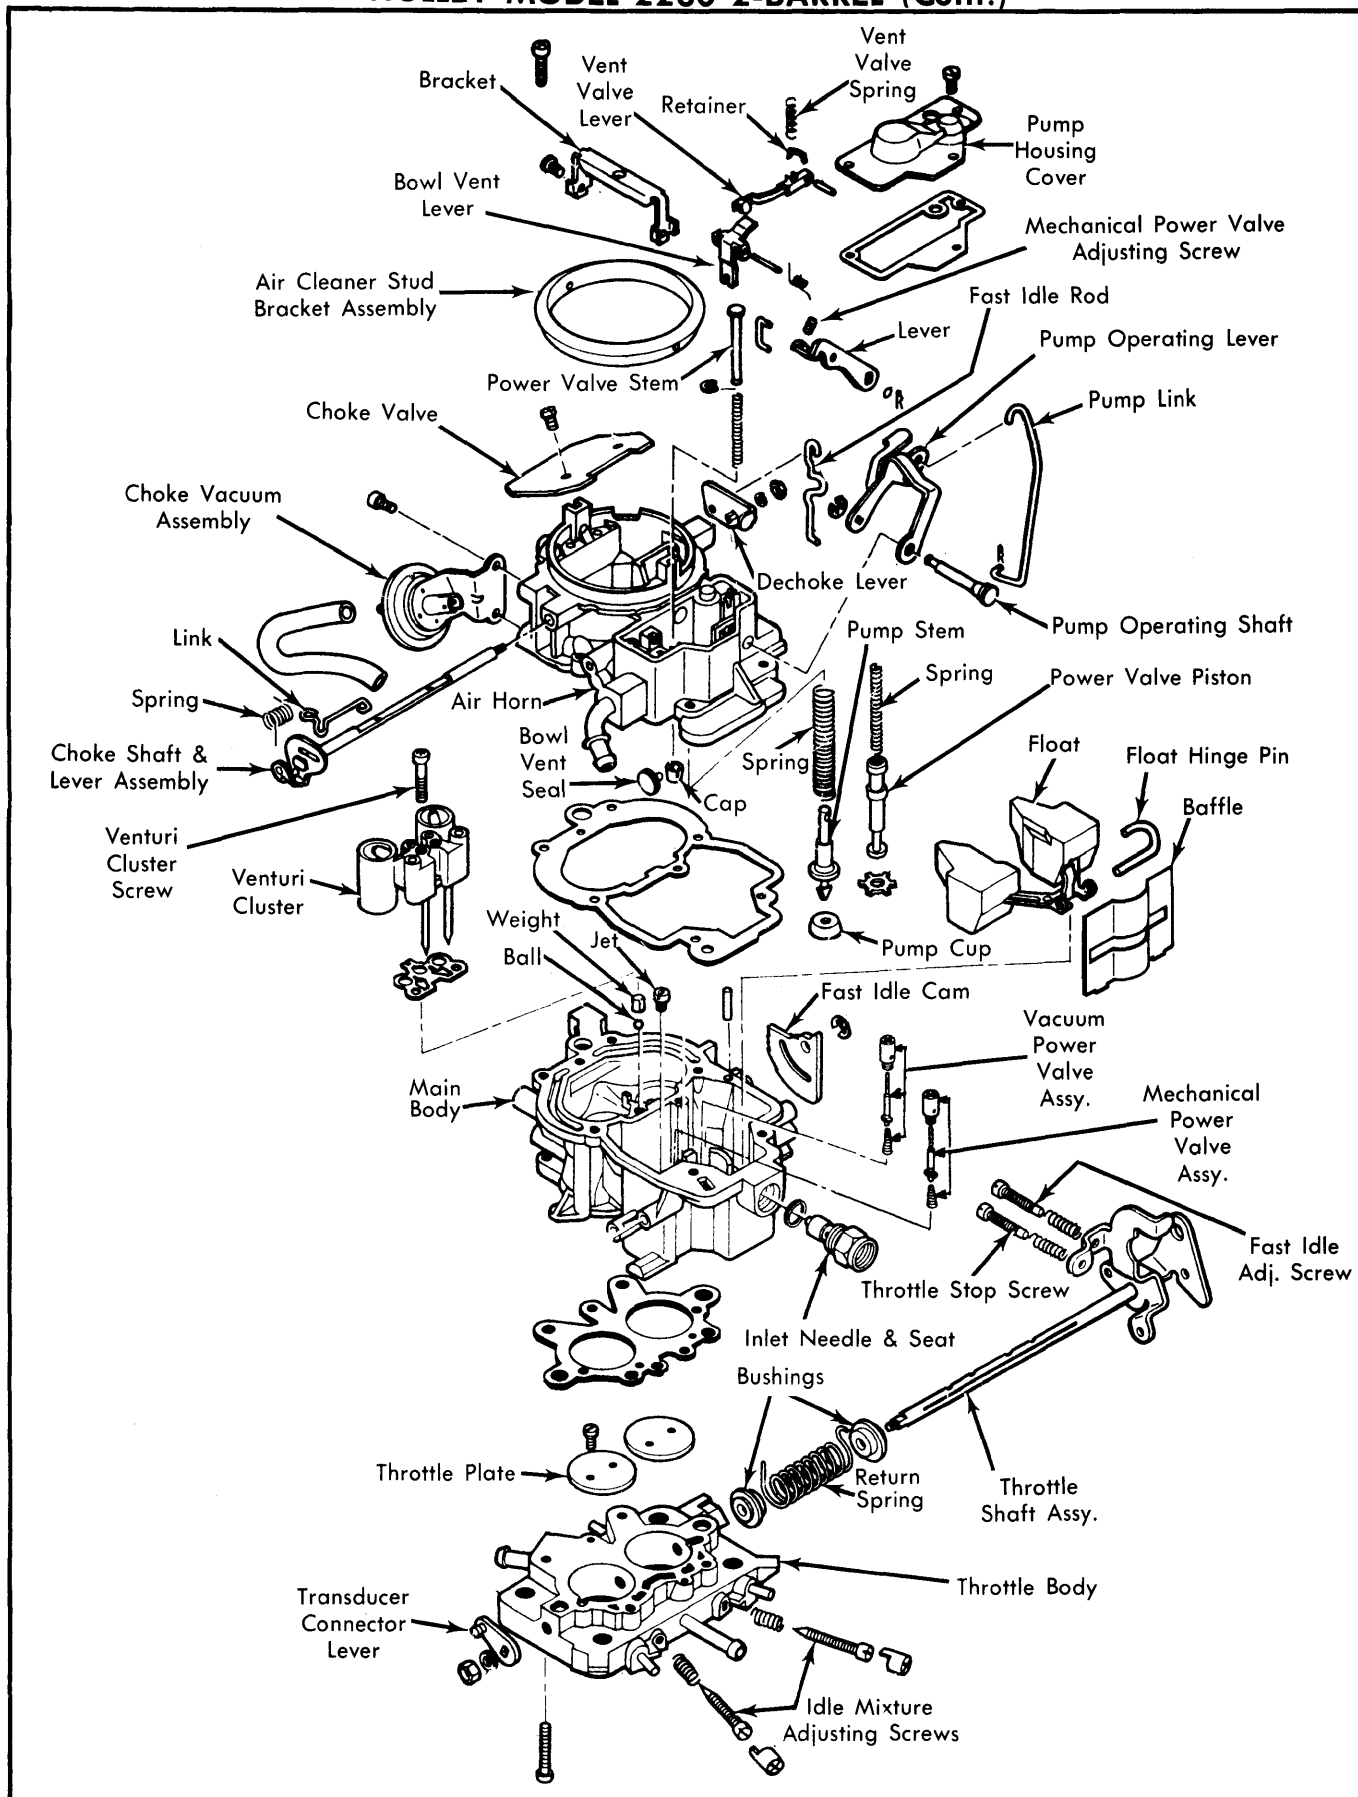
Exploded View of Holley Model 2280 2-Barrel Carburetor
